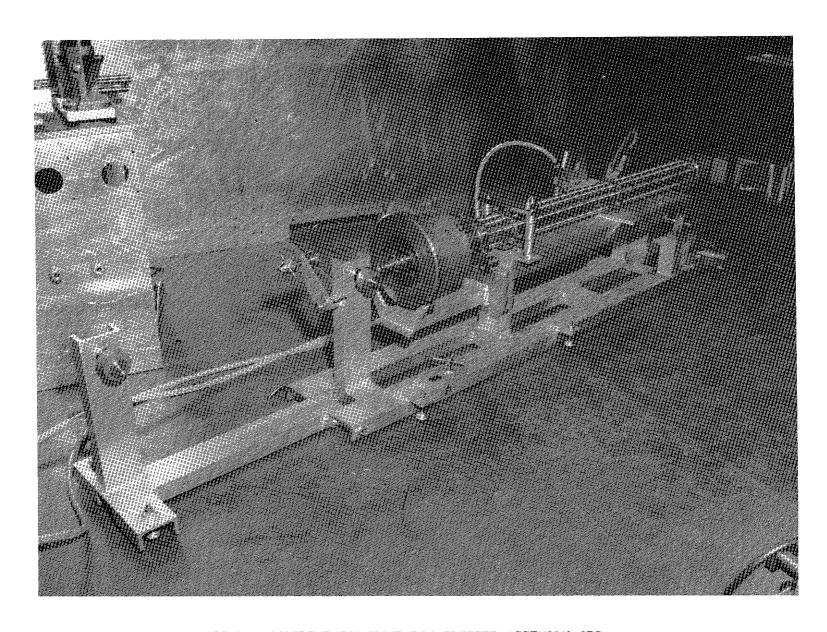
EXPERIMENTAL NINE -PIN CLUSTER ASSEMBLY JIG
